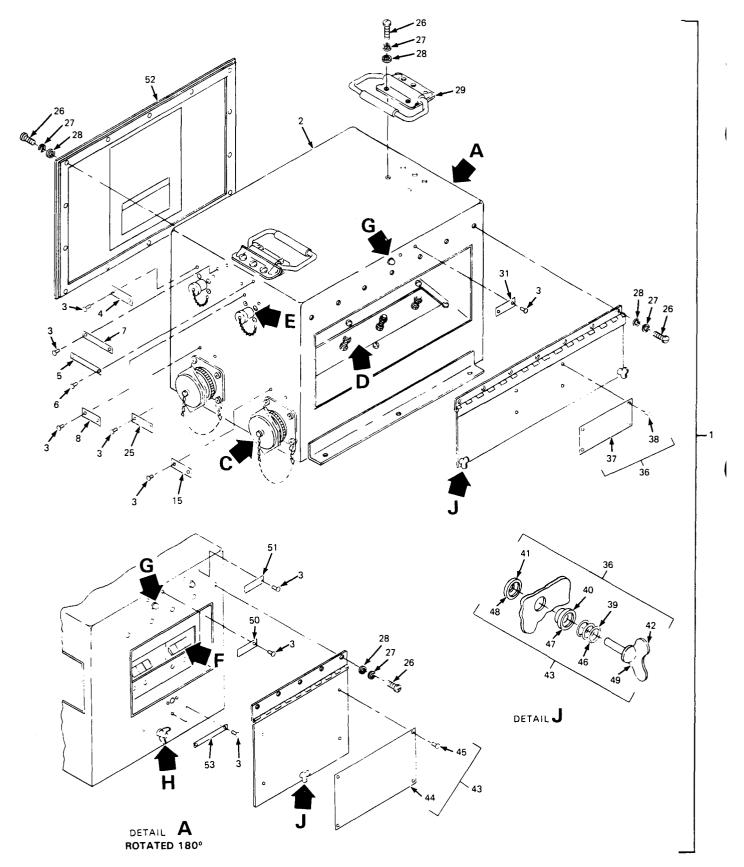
Four-Wire Switch Box Assembly (Sheet 1 of 3).
